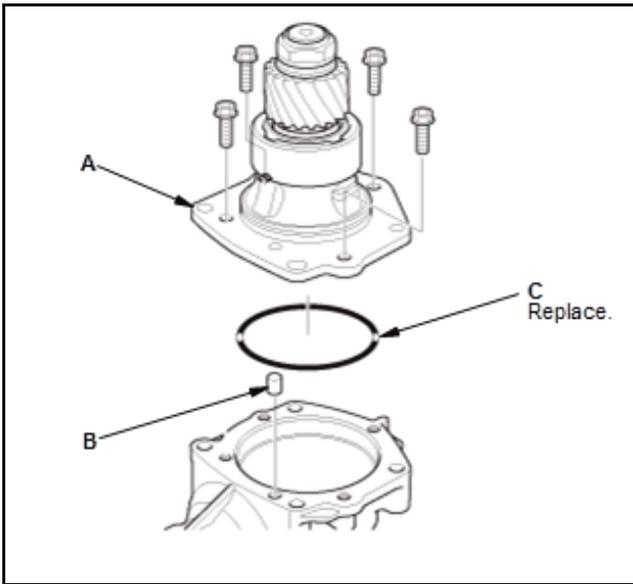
Exploded View Of Transfer Assembly With Torque Specifications
